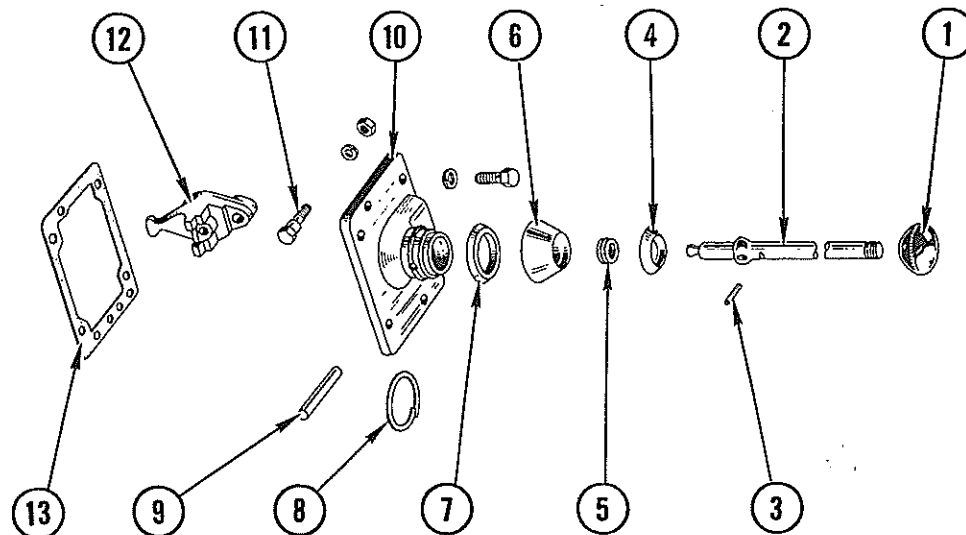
SHIFT LEVER, EXPLODED VIEW
